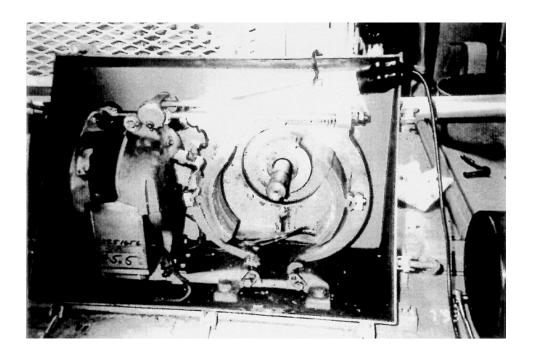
Brake assembly where the brake drum "walked off" from the shaft
